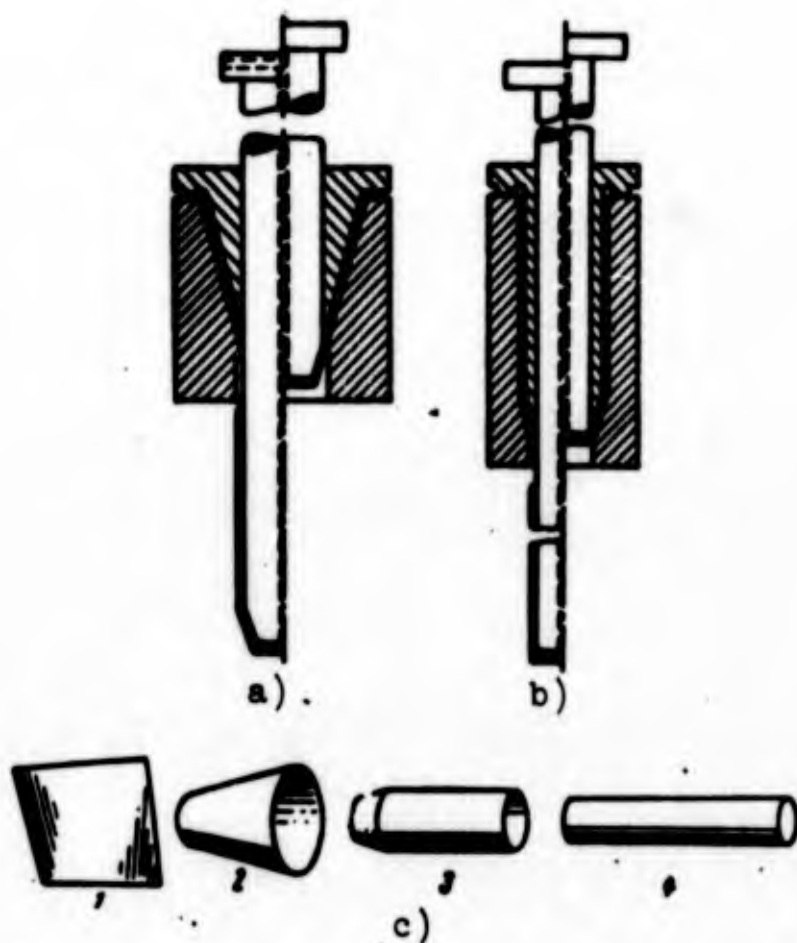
Diagram of manufacture of a tubular billet by the "Multi-Flo-Reform" method. a) preliminary drawing; b) final drawing; c) manufacture.
